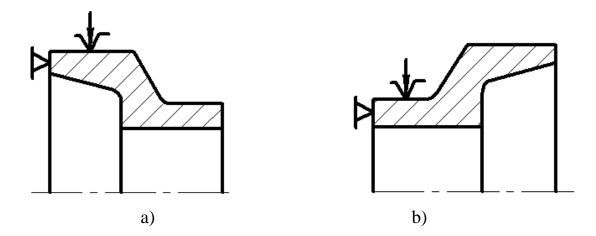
The existing schemes of set workpieces location in the first operation a) on the external surface and end face of the first ring b) on the external surface and end face of the second ring [26]
